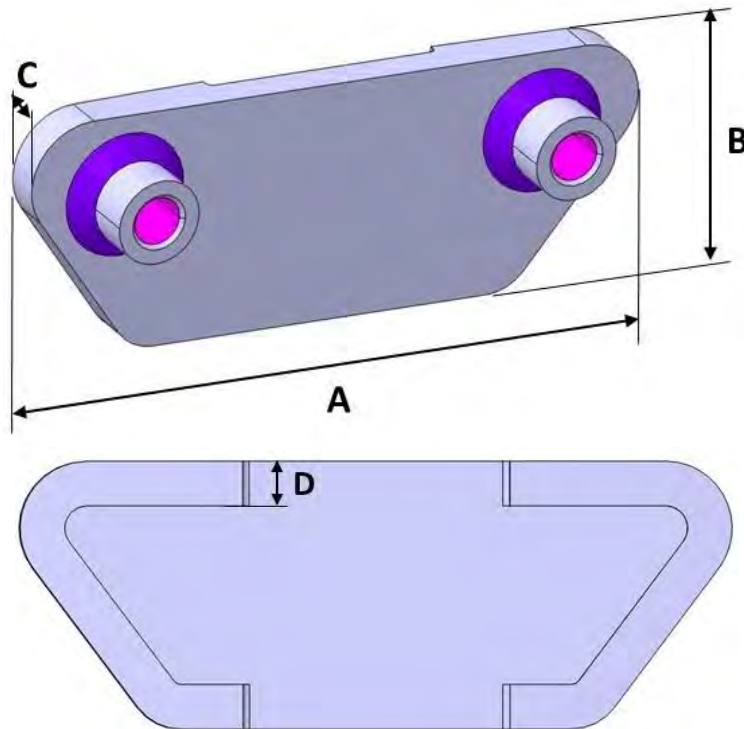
Schematic view of the LFS OWL pad (left: front view; right: back view) with holes for fixation and the metrology marker.
